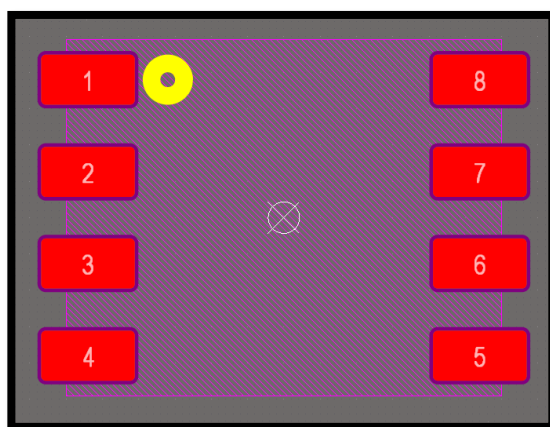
The PCB Footprint for the Dual OPAMP; AD8629ARZ-REEL7
